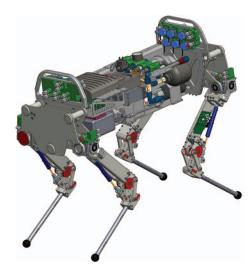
The CAD model of MiniHyQ with exposed view of onboard power pack, magnetic encoder disks and EtherCat control PCB in upper leg link.
